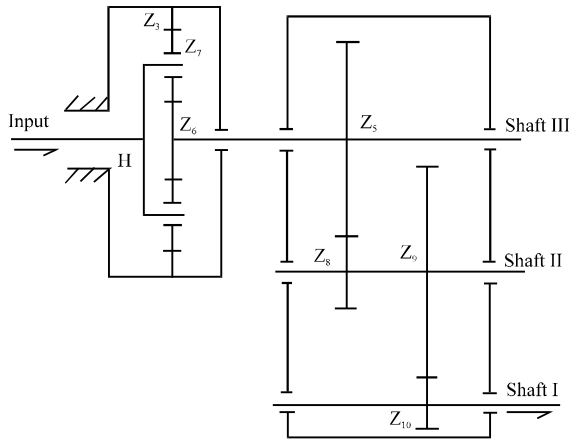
Transmission structure of the gearbox, H: Planet carrier; 3: Inner gear ring; 5: Level-II big gear; 6: center wheel; 7: Planet wheel; 8: Level-II small gear; 9: Level-III big gear; 10: Level-III small gear
